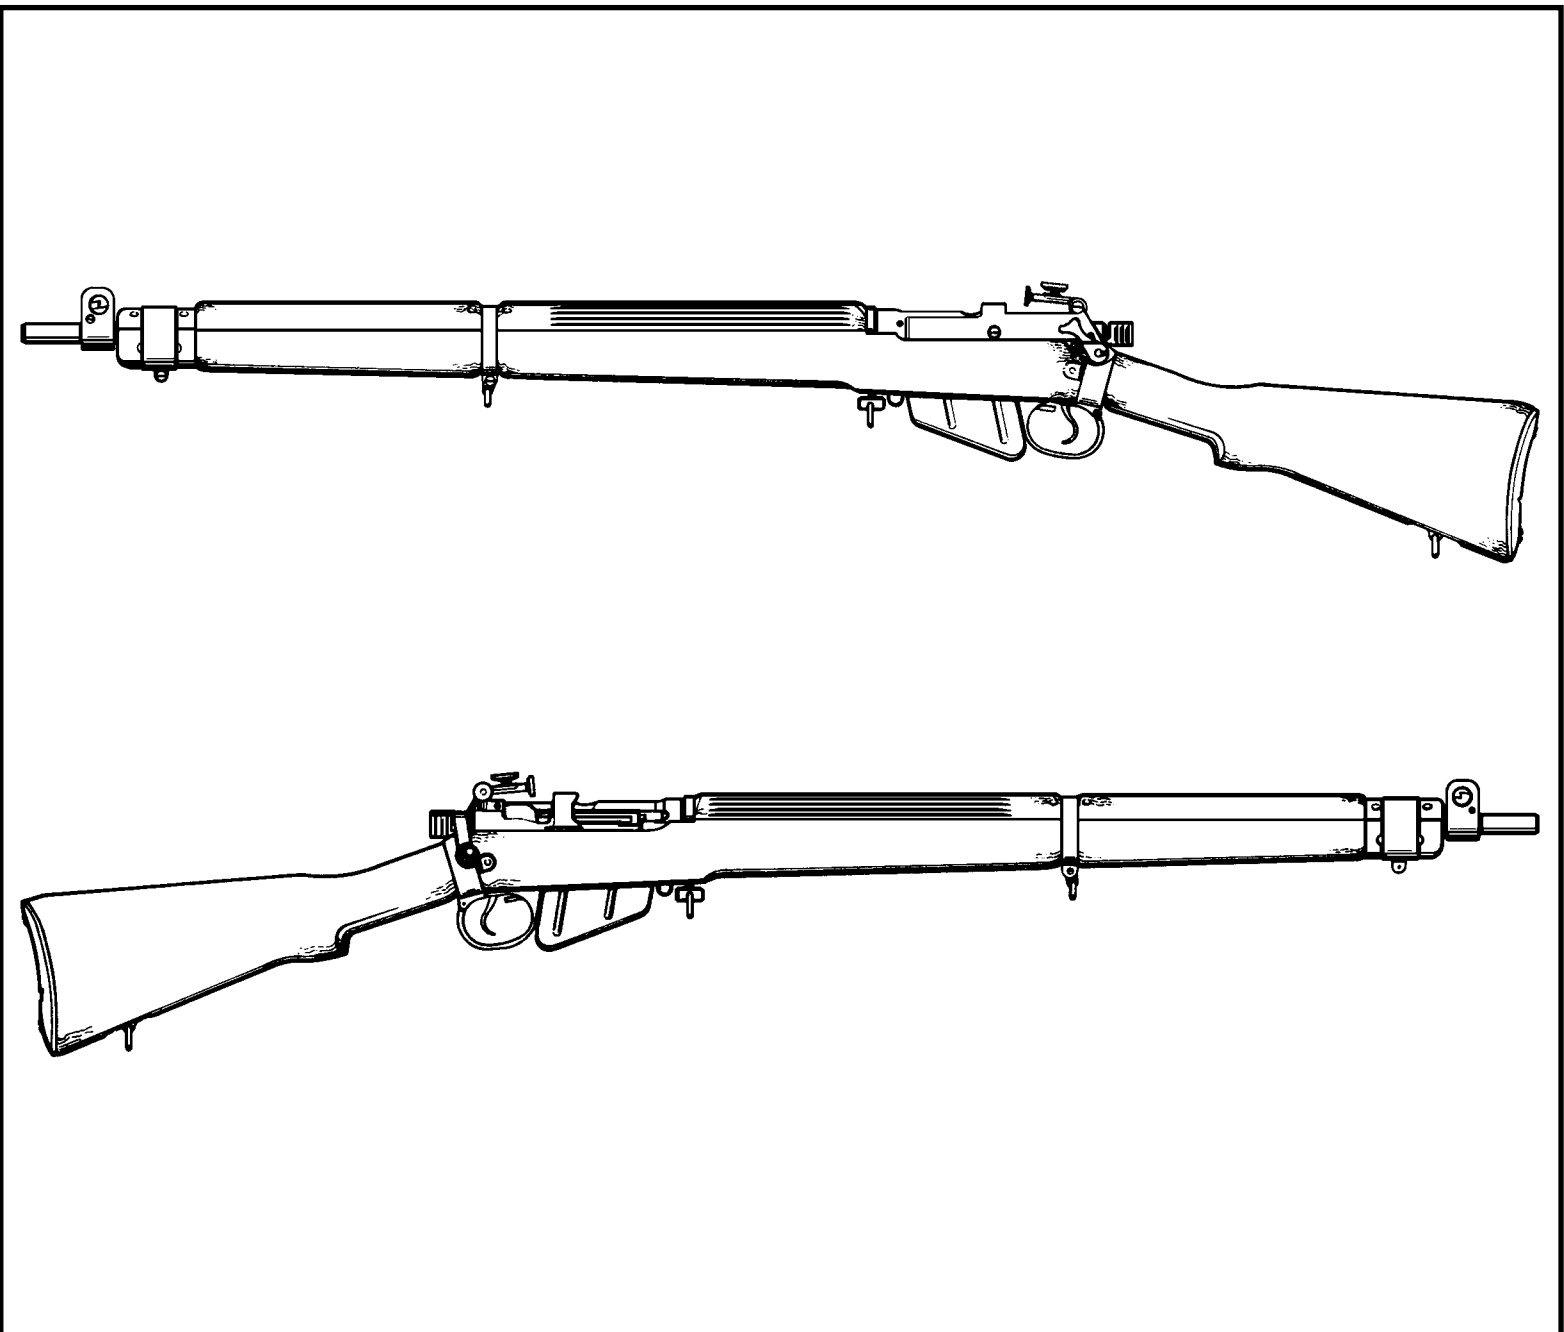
(Sheet 1 of 2) General View of Equipment
